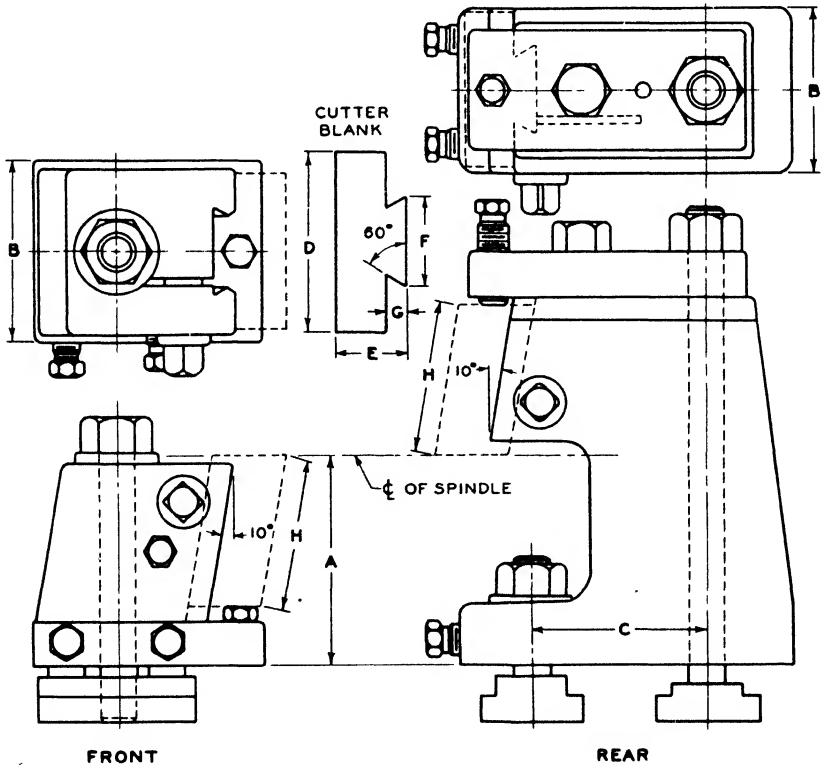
Standard Dovetail Tool Holders for Warner & Swasey Turret Lathe
